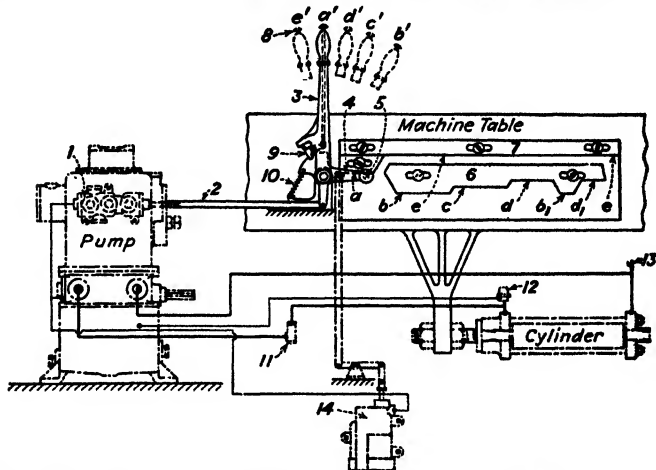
Cam control mechanism and oil circuit. Oilgear pump, valve, cylinder, etc. (1) Six-way control valve, may be mounted on side of pump case, on frame or any nonmoving part of machine; (2) valve stem connection to hand-control lever (3) and cam-roller arm (4); (5) cam-roller spindle, has ball bearings, and when in action follows the cam outlines *a, b, c*, etc. on camplates (6) and (7); (8) pushbutton for lifting latch (9) out of the notch in cam-roller (4) and thus releasing (3) and (2) from (4). This permits of operating the valve independently of the cam to stop or reverse the worktable at any point in case of emergency. (10) Tension spring between stationary bracket and cam-roller arm (4); (11) foot valve; (12) automatic air drain valve; (13) air-drain petcock; (14) dashpot may be installed if a dwell at each end of feed is desired.
